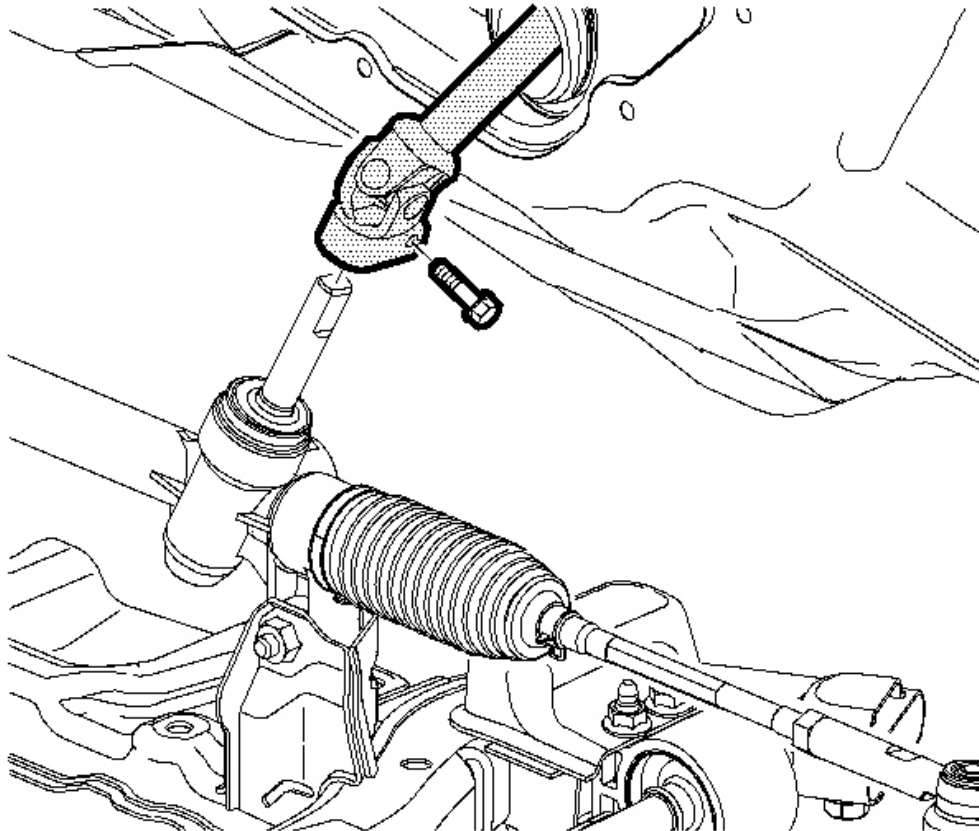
Removing/Installing Steering Shaft To The Intermediate Shaft
